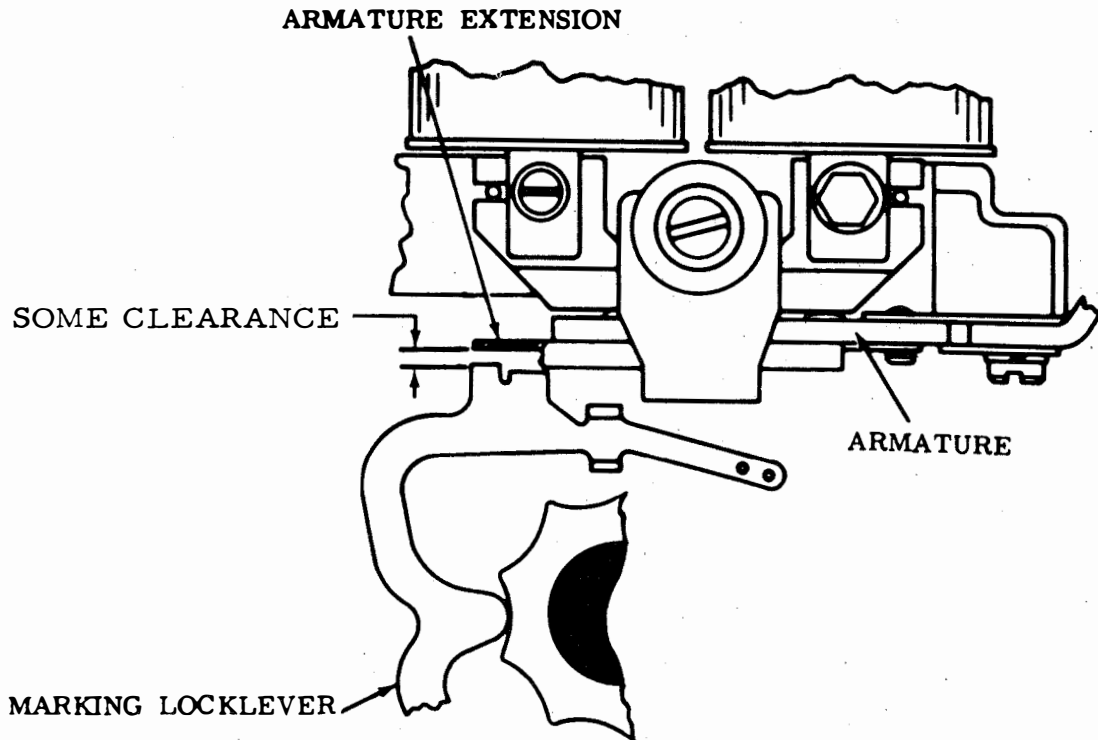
Selector Magnet Bracket Marking Locklever, Front View
